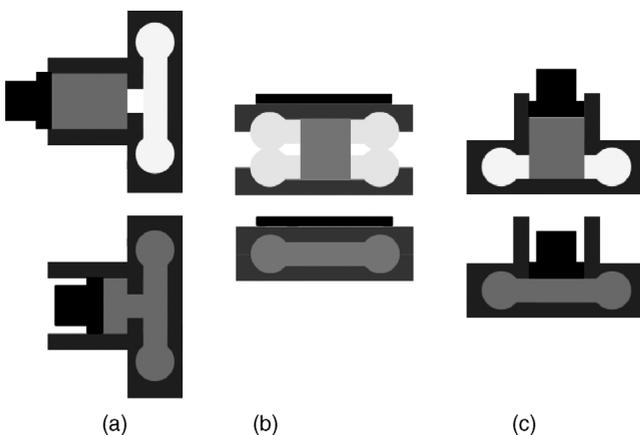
Schematic view of different thixoforming processes: (a) thixocasting; (b) thixoforging; (c) thixo lateral extrusion.
